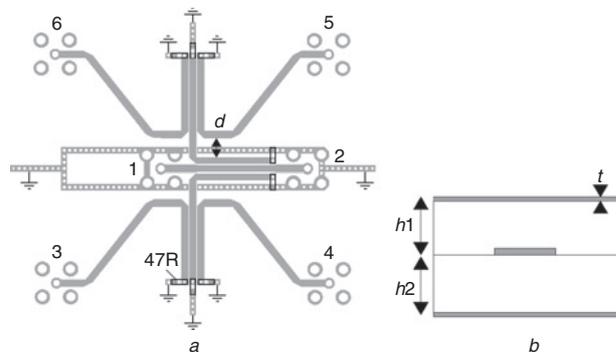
Layout of coupler with additional screening structure and detail of stripline layout
